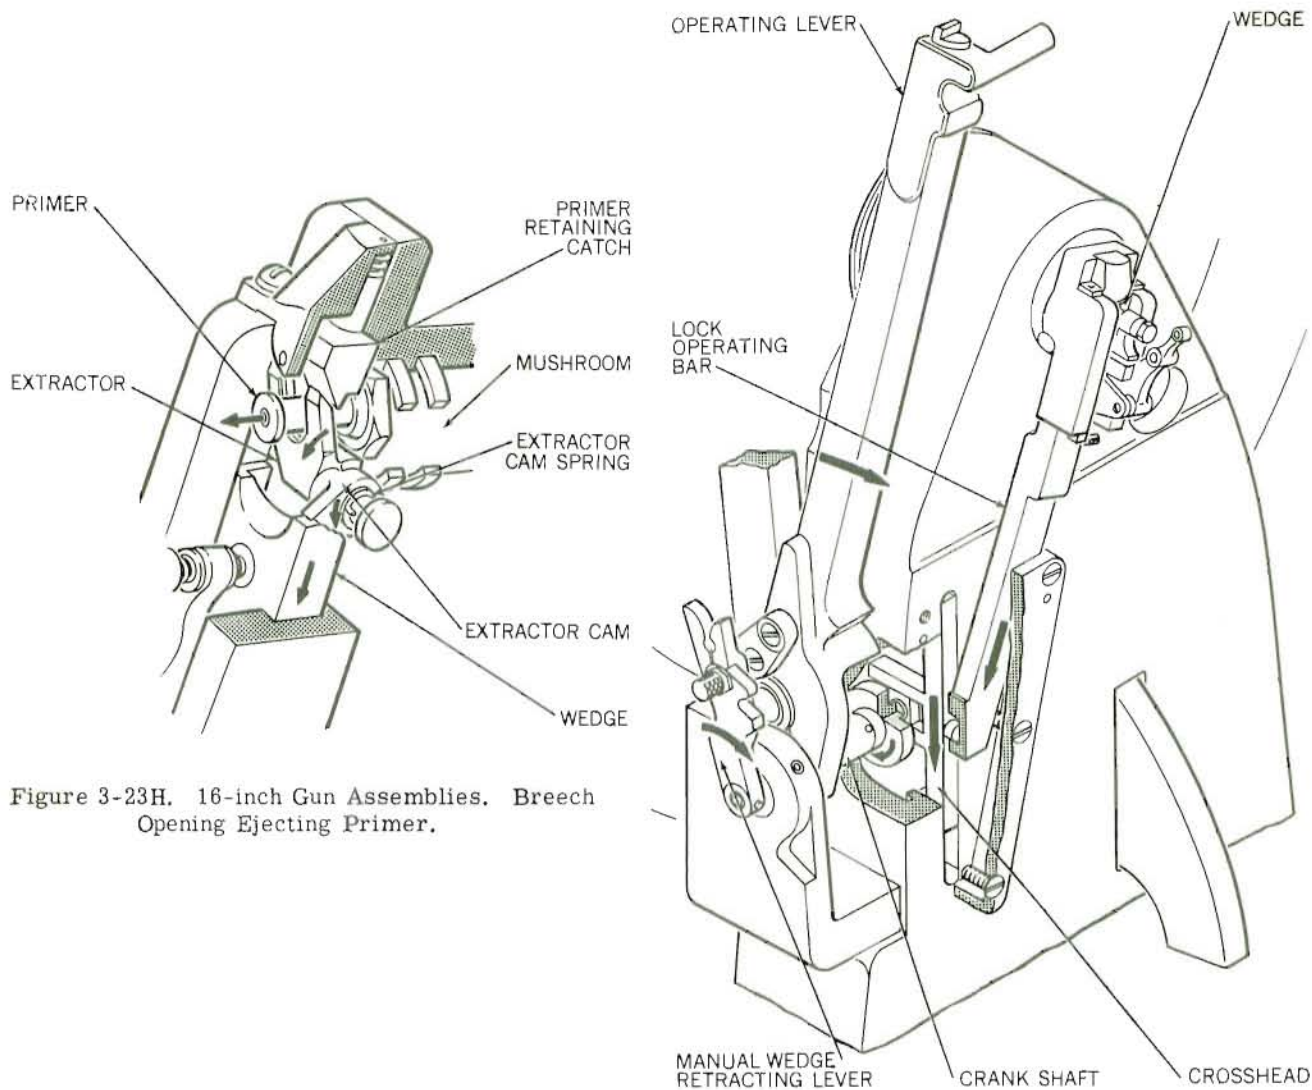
H. 16-inch Gun Assemblies. Breech Opening Ejecting Primer.
